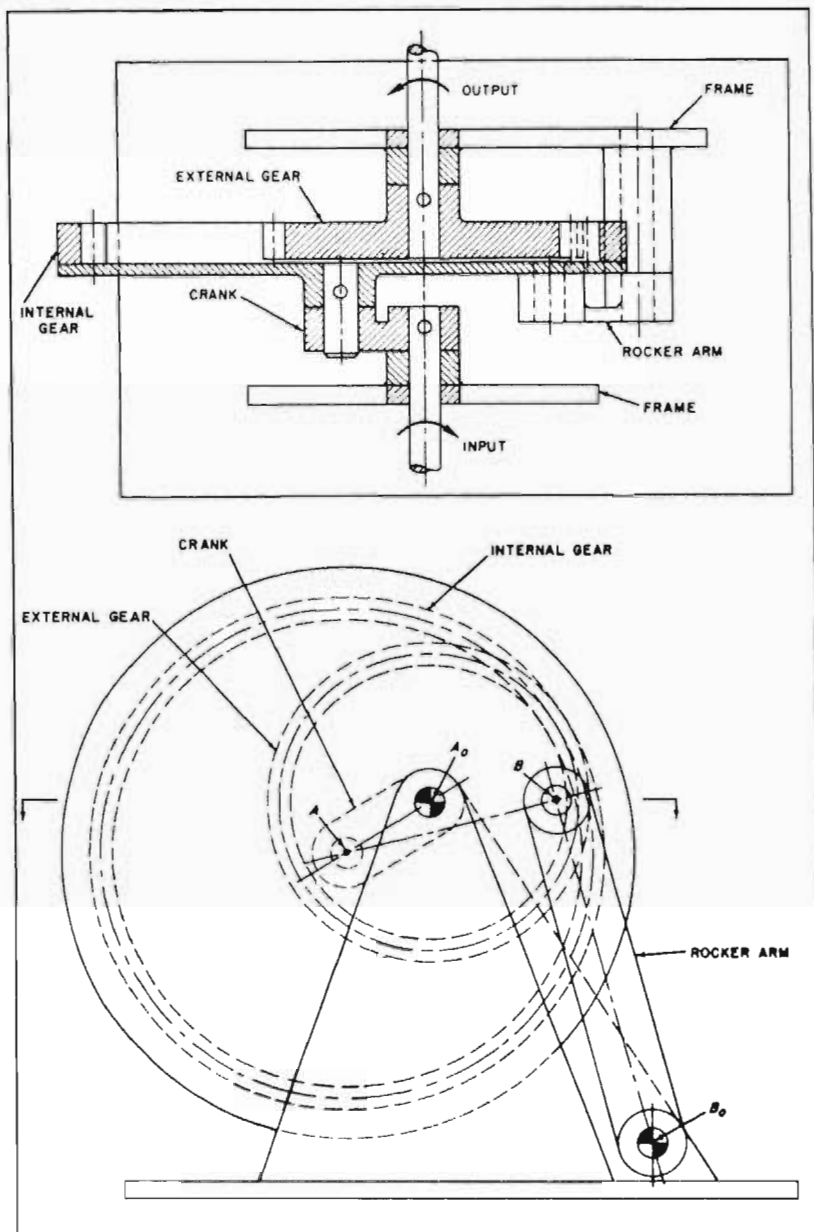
Crank translates internal gear, causing external gear, with which it meshes, to rotate.
